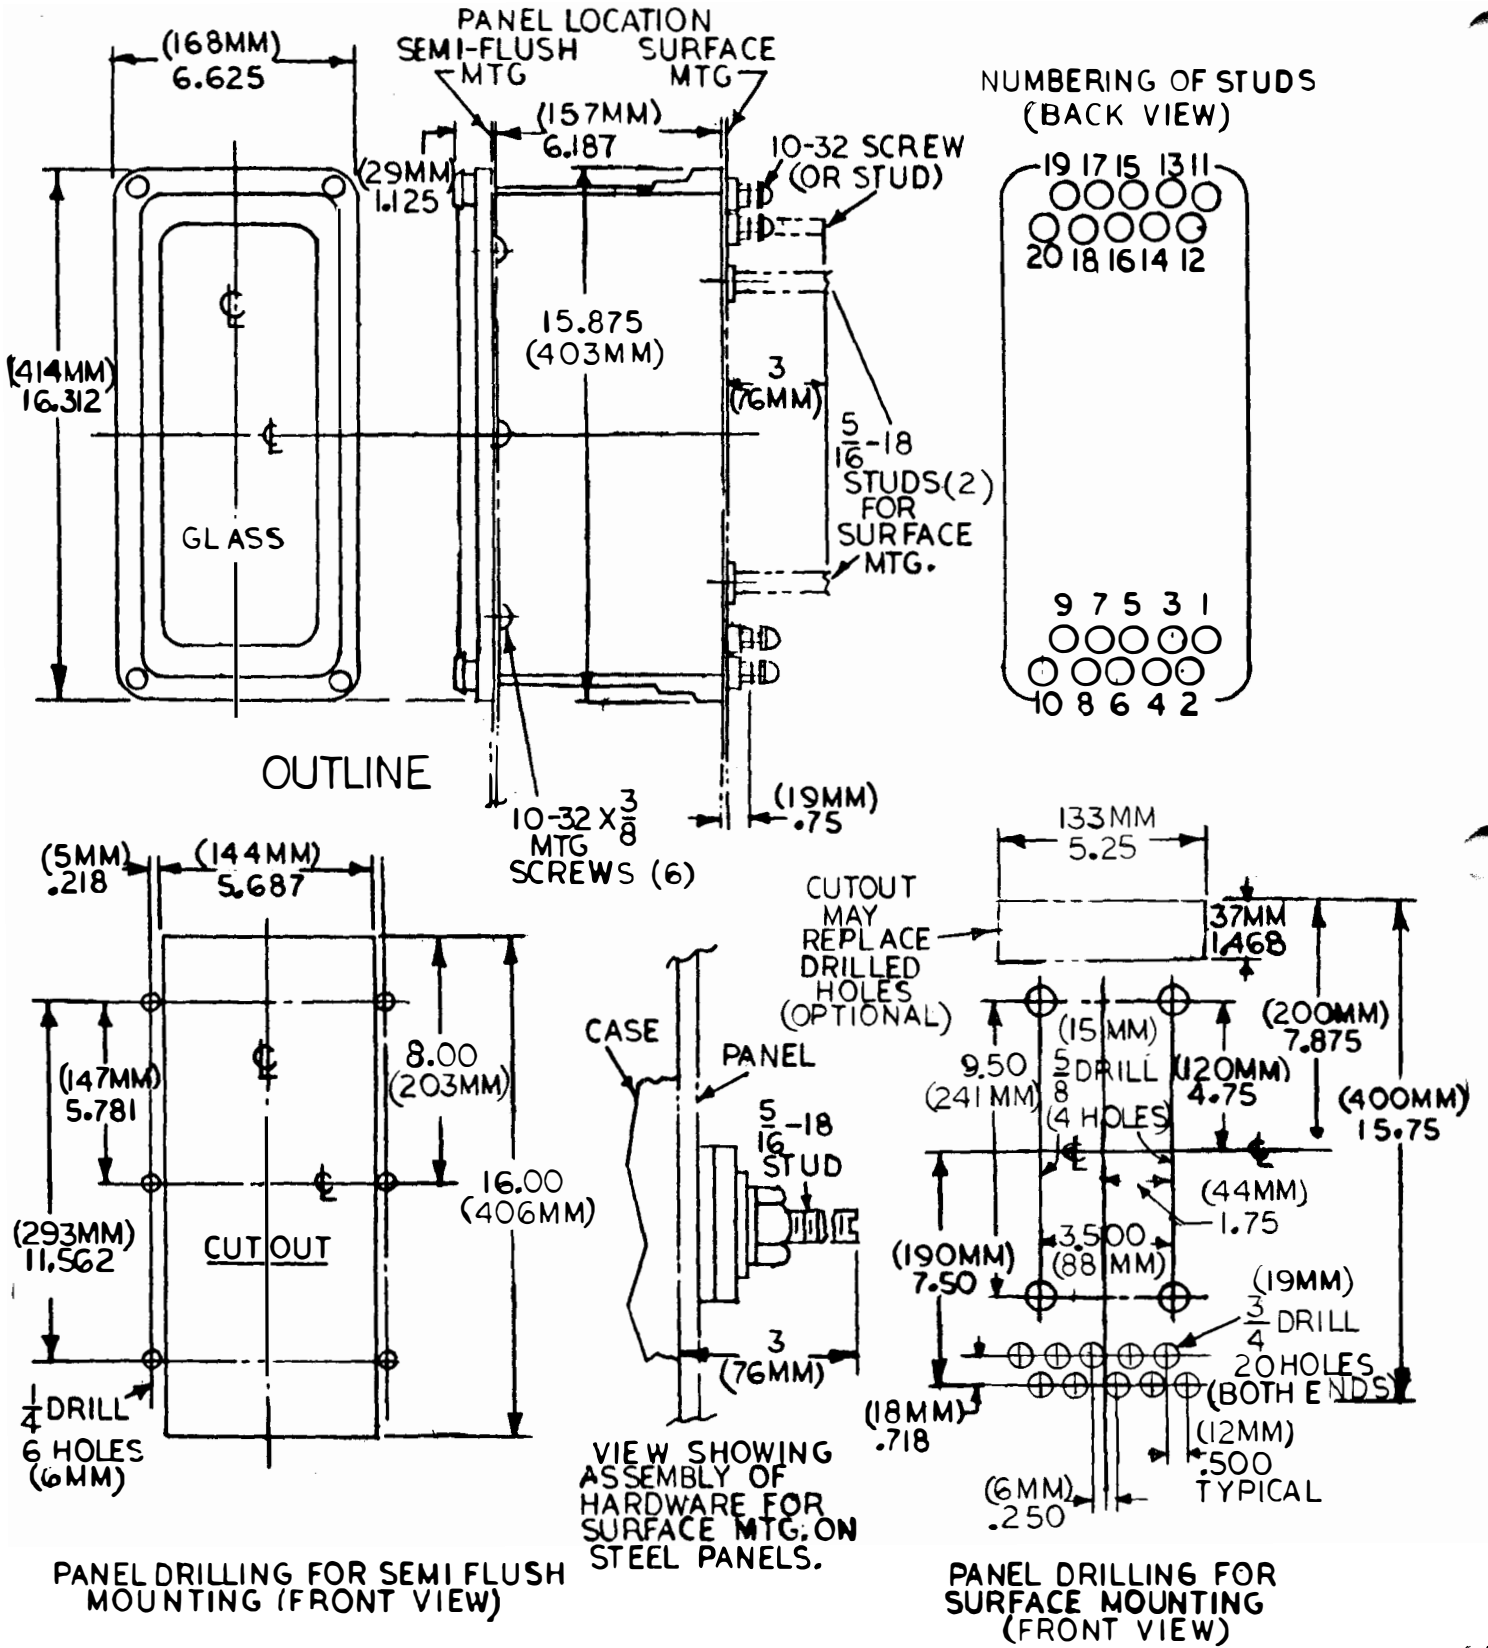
(K-6209274-2) Outline And Panel Drilling Dimensions For The GGP53B Relay
